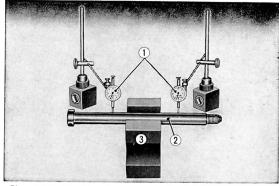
Checking the rear axle for bend 1 Dial gauge
